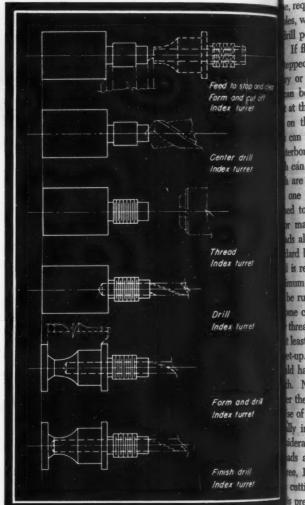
Long forming cuts require a set of several arm forming tools, finishing the outer surfaces fint
